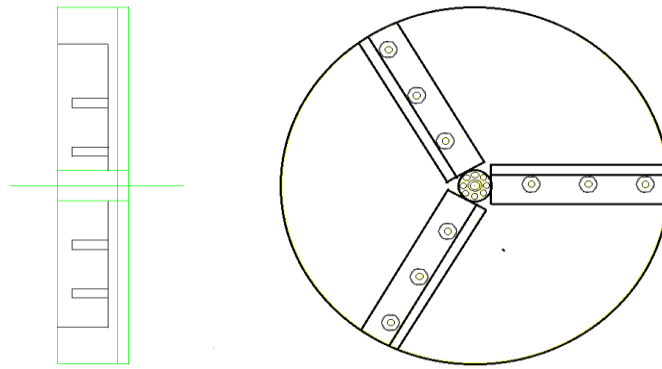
Elevation and side view of the cutting disk of the chopping machine.
